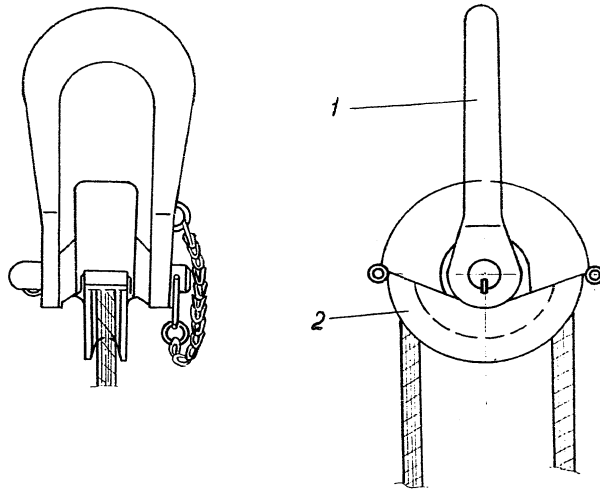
SHACKLE-AND-PULLEY ASSEMBLY
